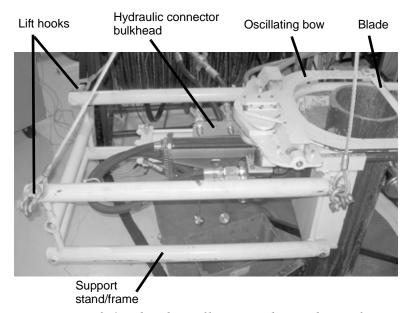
The photo illustrates the mechanical components of the Super C pipe saw.
